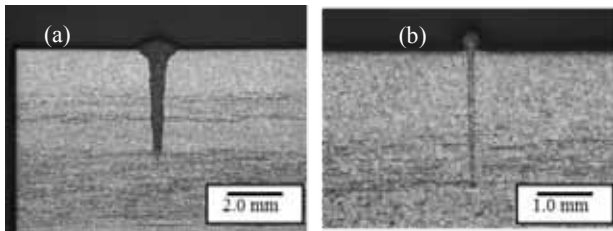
Cross-section view of SUS304 with SM1kW fiber laser (a) 1m/min (b) 10/min
